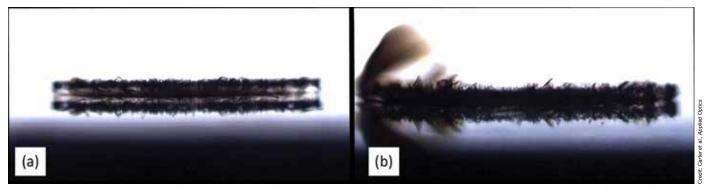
Illustration of the weld failure mechanism for a glass-metal bond. Both images are taken side on with a reflection of the weld and the metal surface visible toward the bottom of the images. Image (a) is an untested example. Image (b) was taken partway through the welding process, and a crack in the glass has developed. Adapted from Carter et al.°
